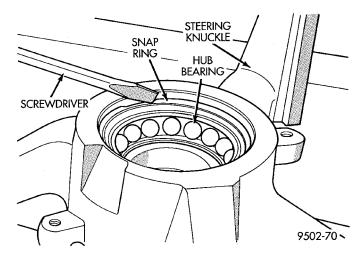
Hub Bearing Retaining Snap Ring Removal
